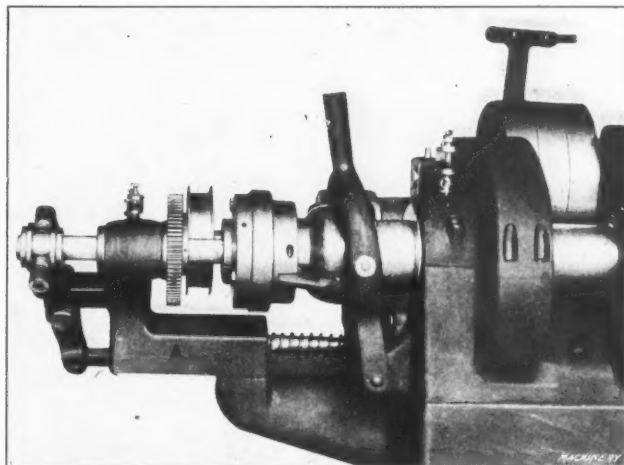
Driving Mechanism for Boring and Back-facing Attachment
